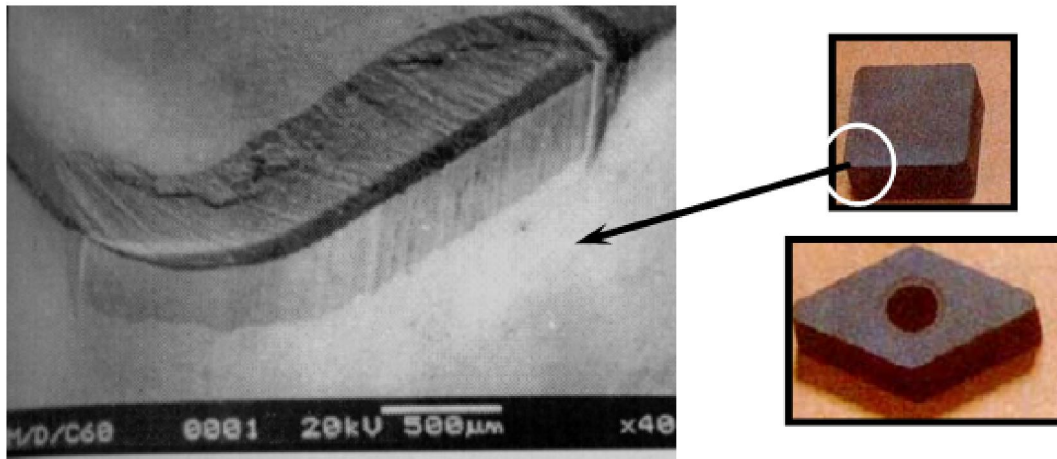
(b) Photographic view of the wear pattern of a turning tool insert
